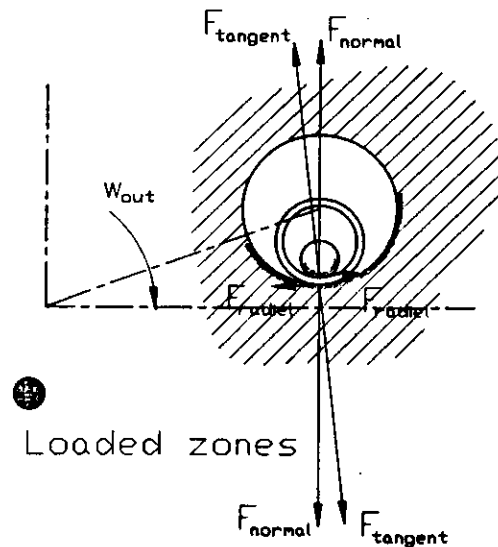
Forces and loaded zones in the contacts between wheel, bushings and carrier pins.
